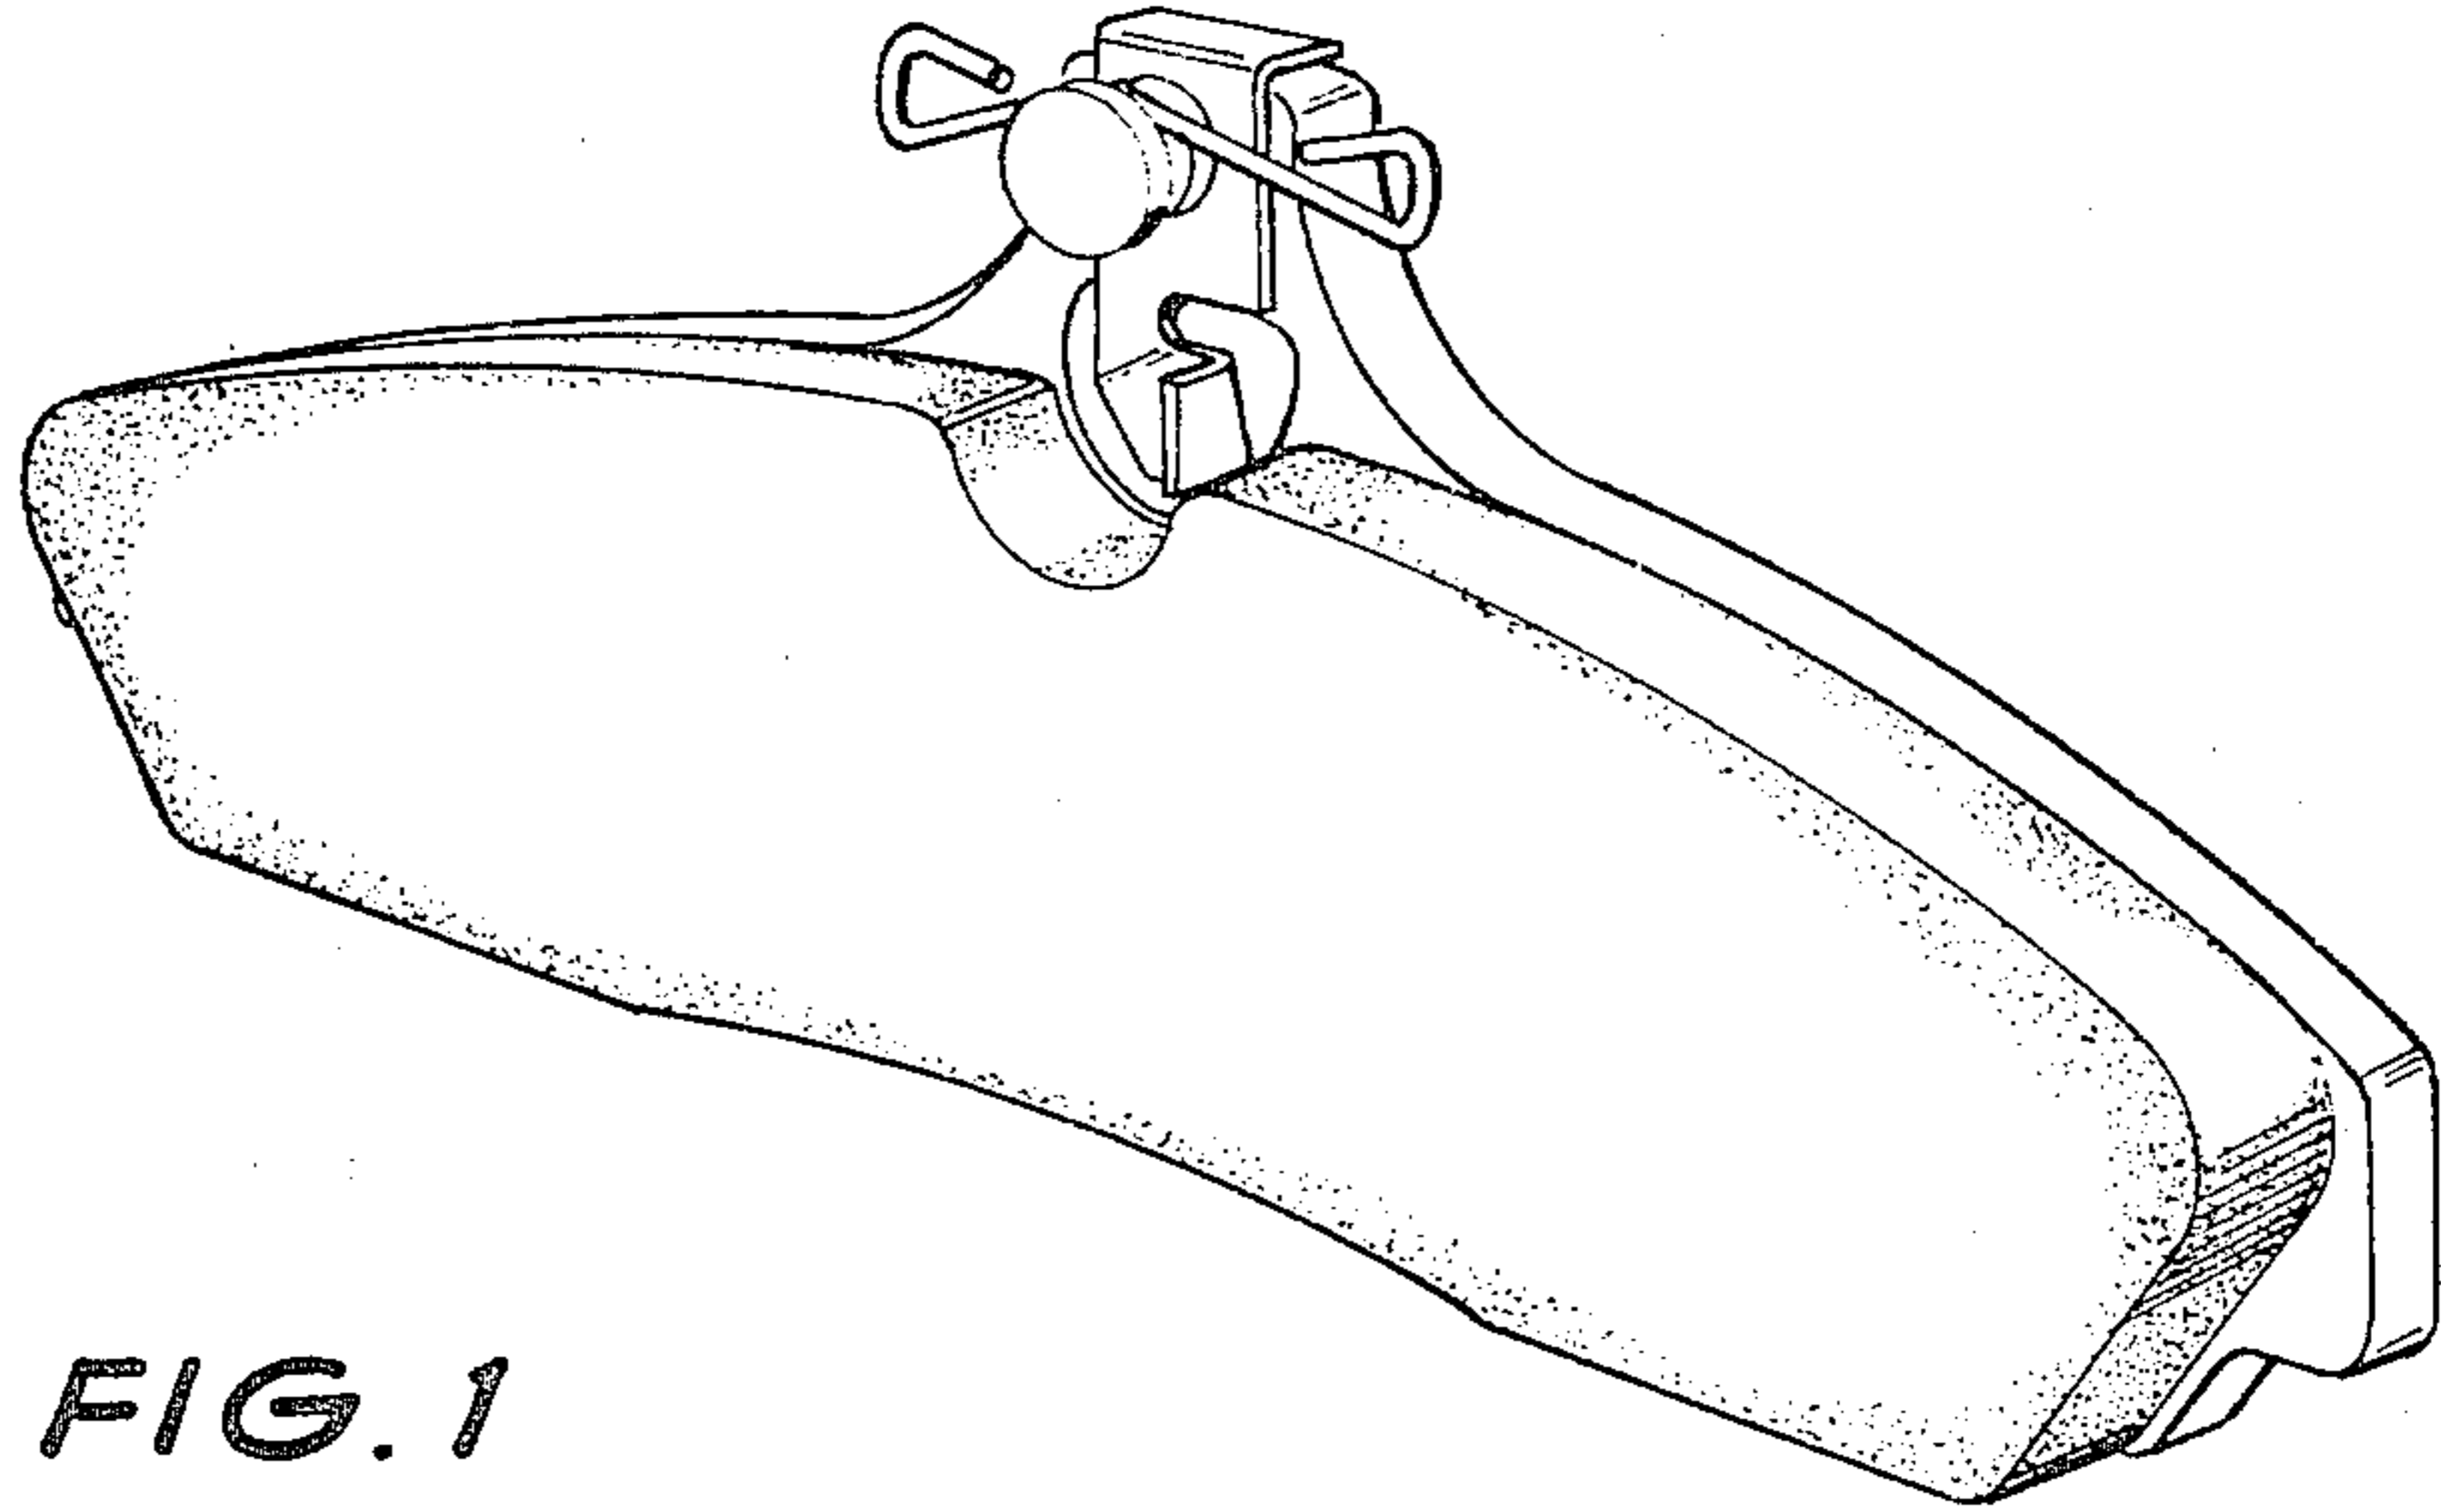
is a perspective view of the disc brake pad unit in accordance with the ornamental design, FIG. 2 is a top plan view thereof, FIG. 3 is a bottom plan view thereof, FIG. 4 is a front elevational view thereof, FIG. 5 is a rear elevational view thereof, FIG. 6 is a view in elevation of one end thereof and, FIG. 7 is a view in elevation of the other end thereof.
